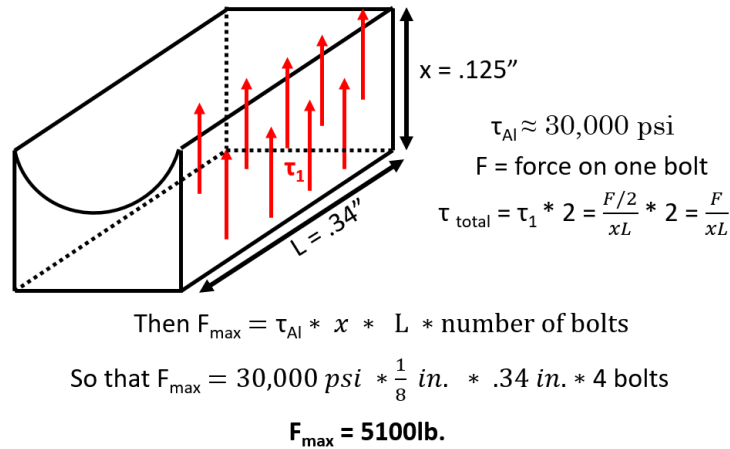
Custom Machined Avionics Aft Bulkhead Analysis
